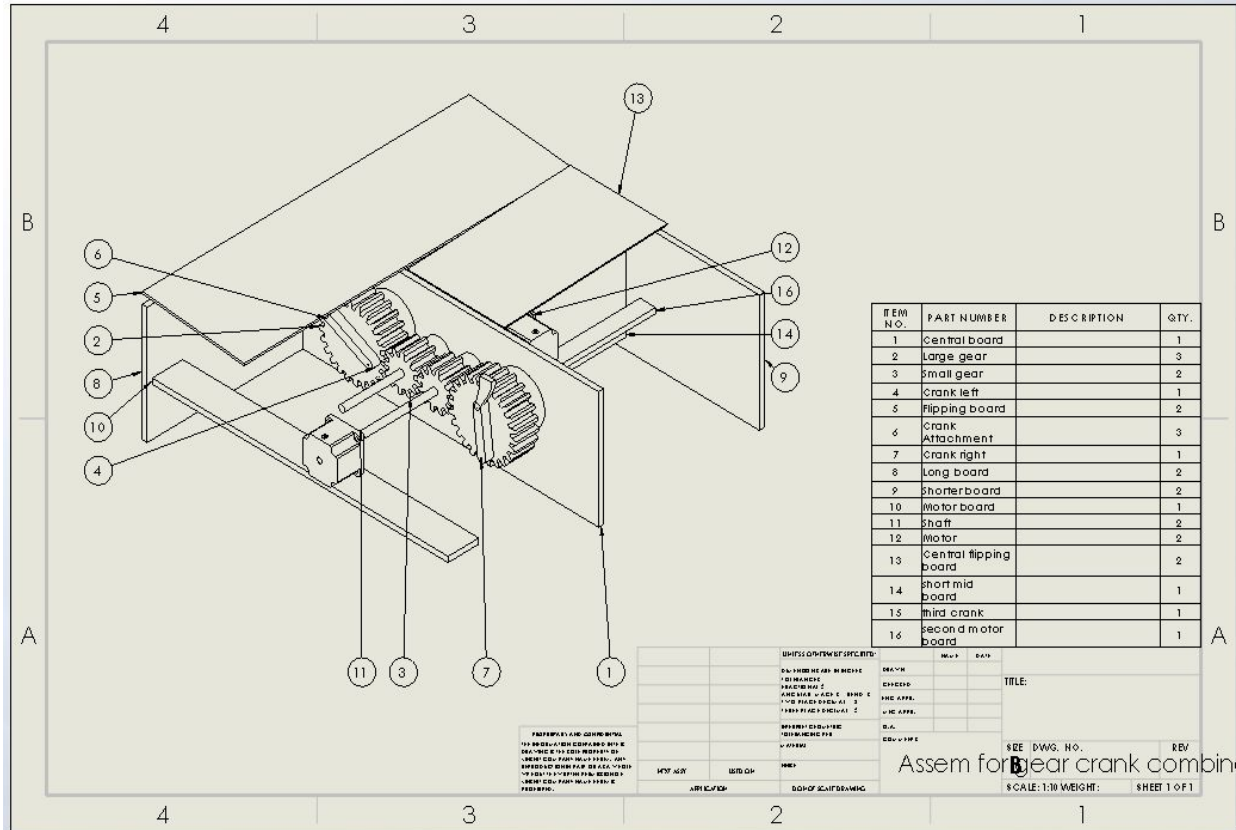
Isometric drawing with bill of material of the clothes folding machine.
